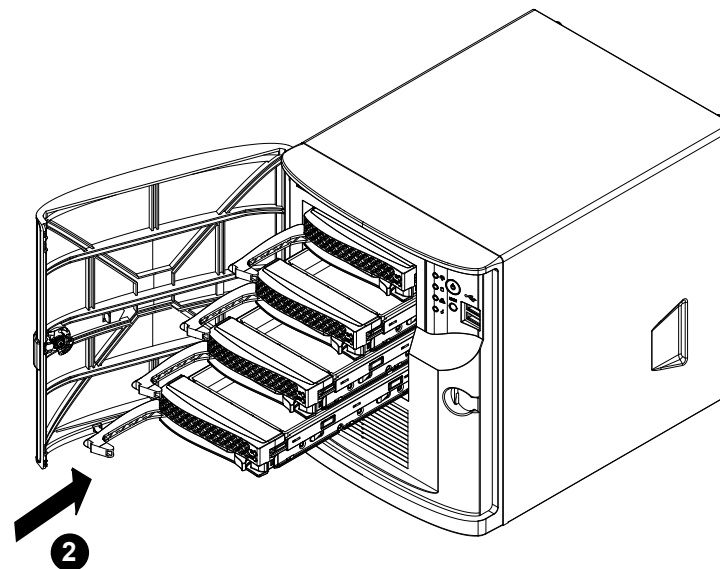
Installing the Hard Drive Carrier into the Hard Drive Cage
